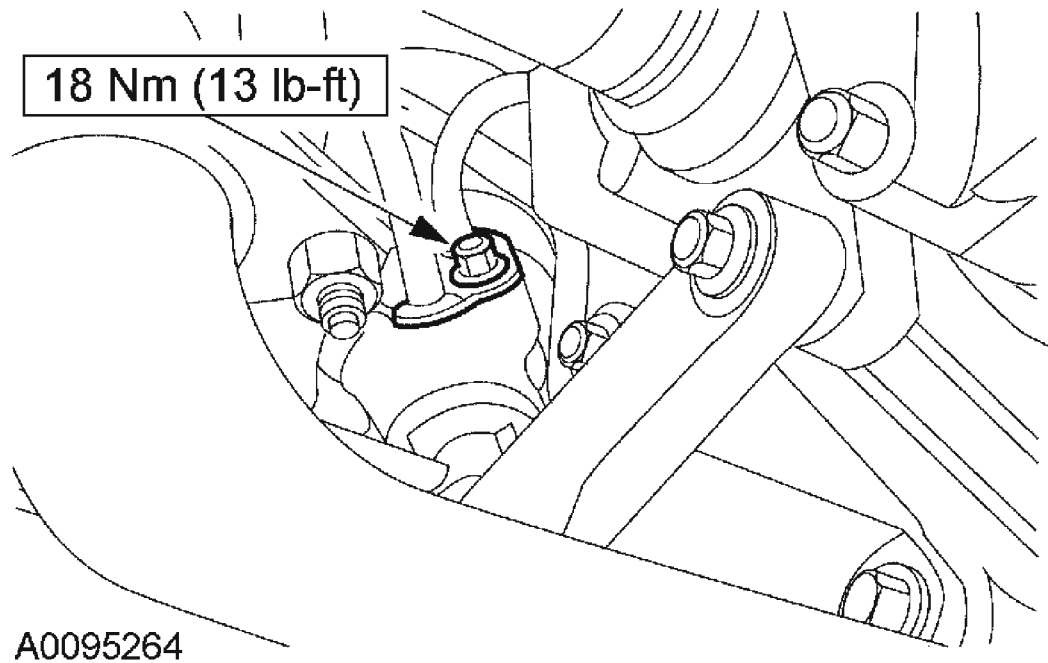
Removing Power Steering Line Clamp Plate Bolt
